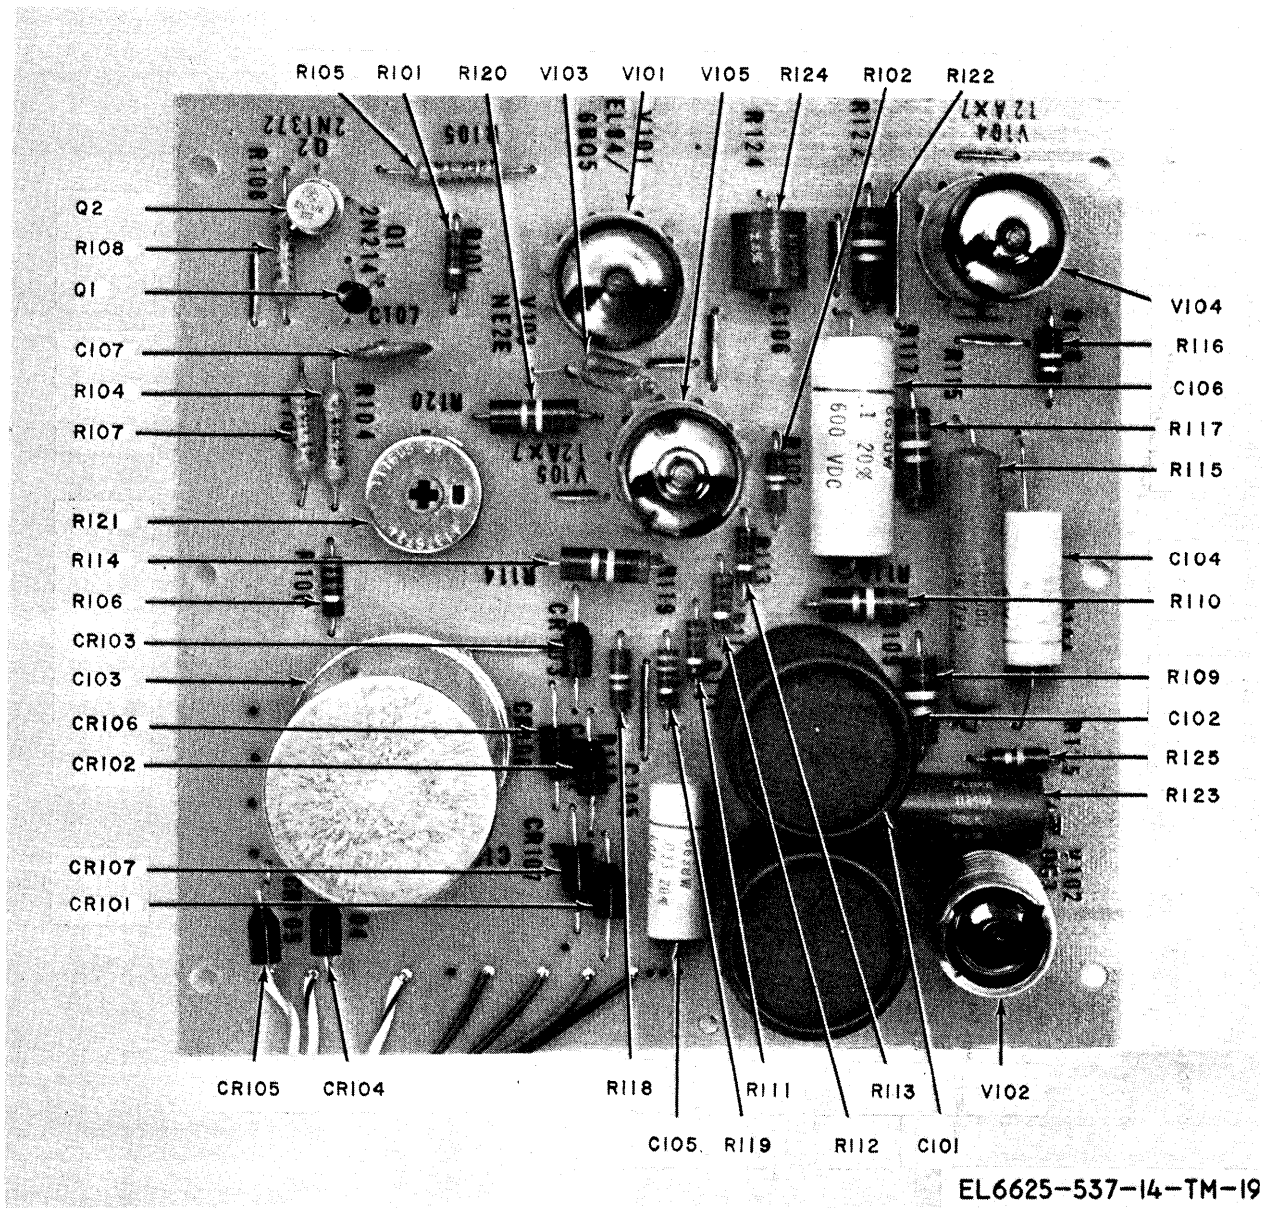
500-volt dc reference supply printed circuit board, showing component location.
